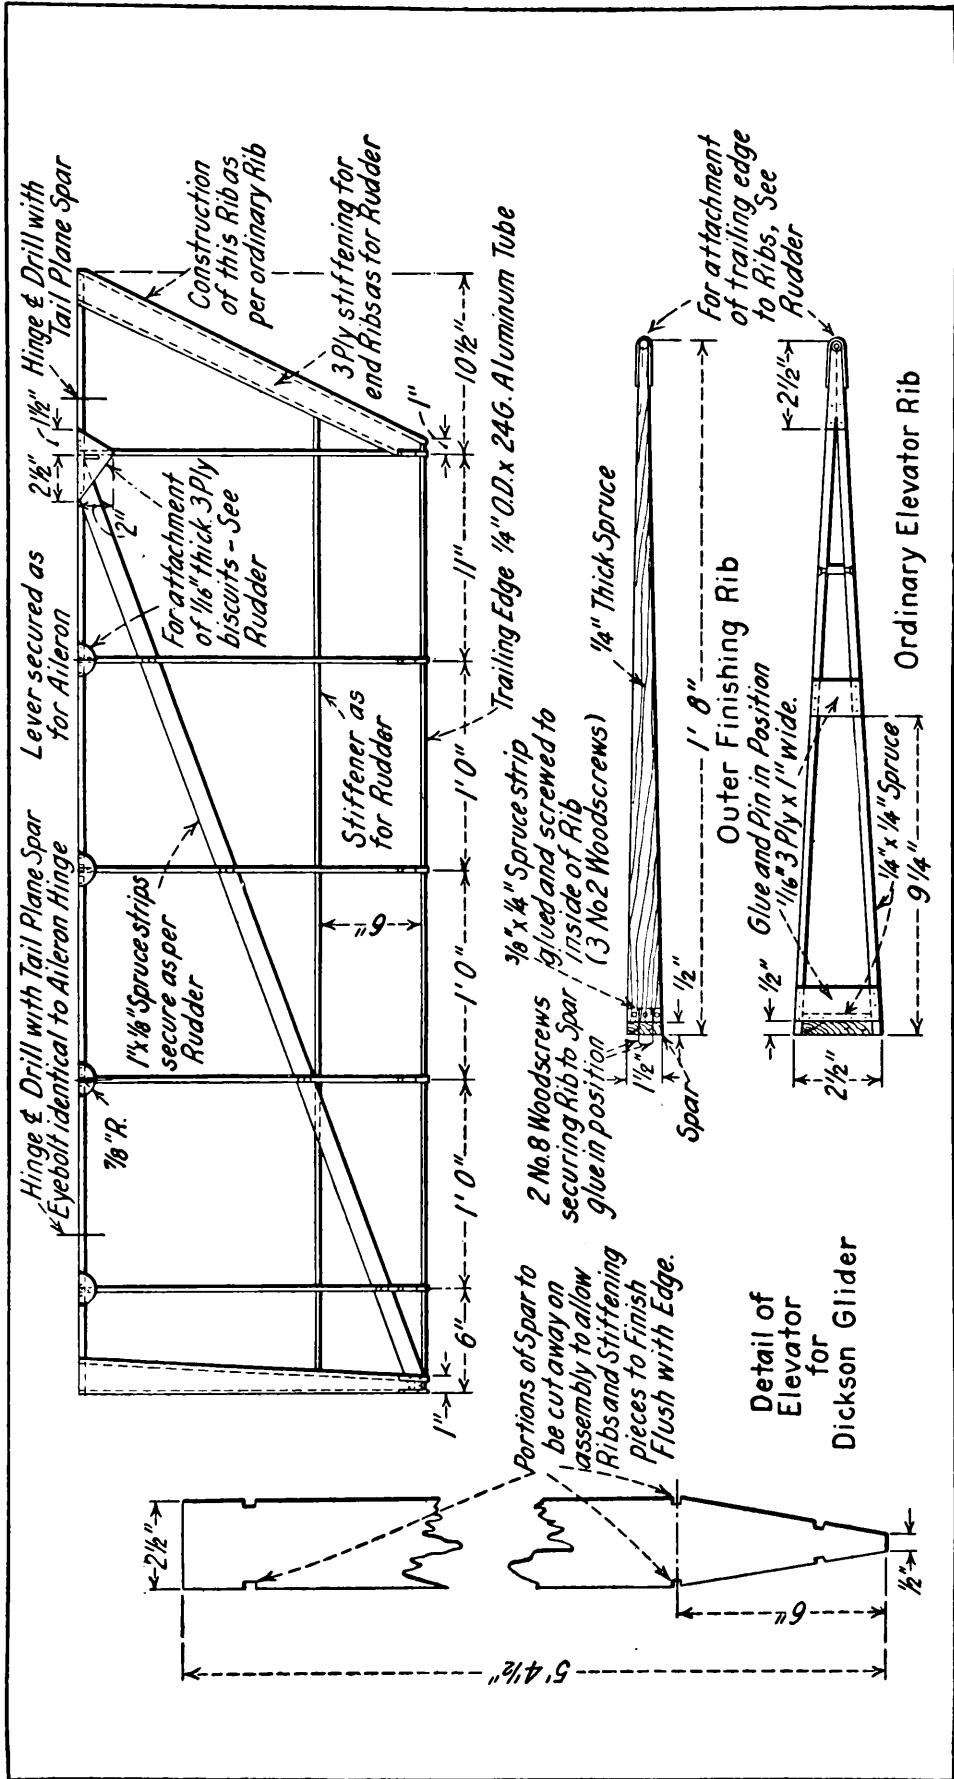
Detailed Drawings Showing the Elevator Frame Assembly Construction for the Dickson Training Glider, Also the Method of Making Ordinary and Outer Finishing Ribs.
